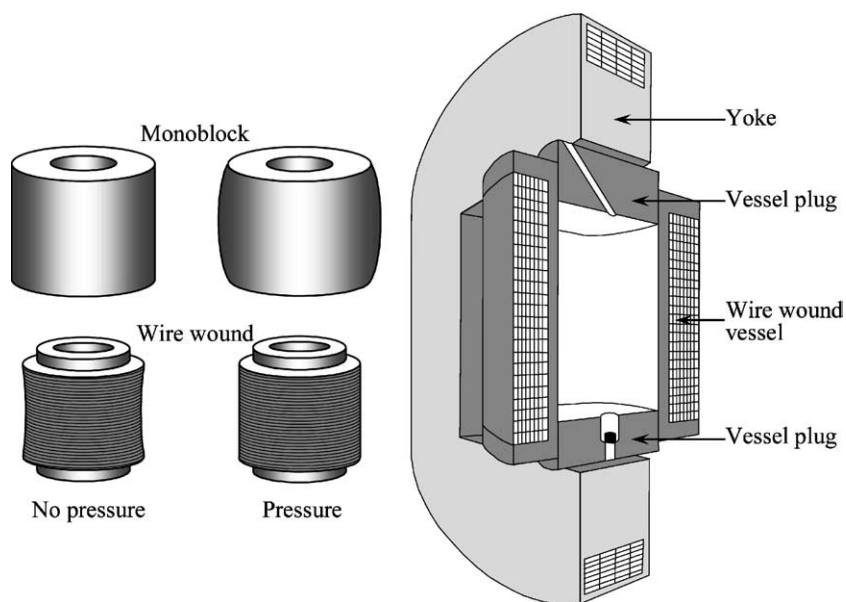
Monoblock casting technology for moderate pressure/size vessels and wire-winding technology for vessels and yoke used in larger size and higher pressure applications.
